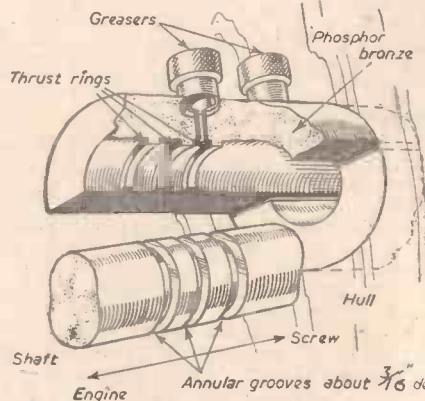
The propeller shaft and its waterproof rear bearing.
